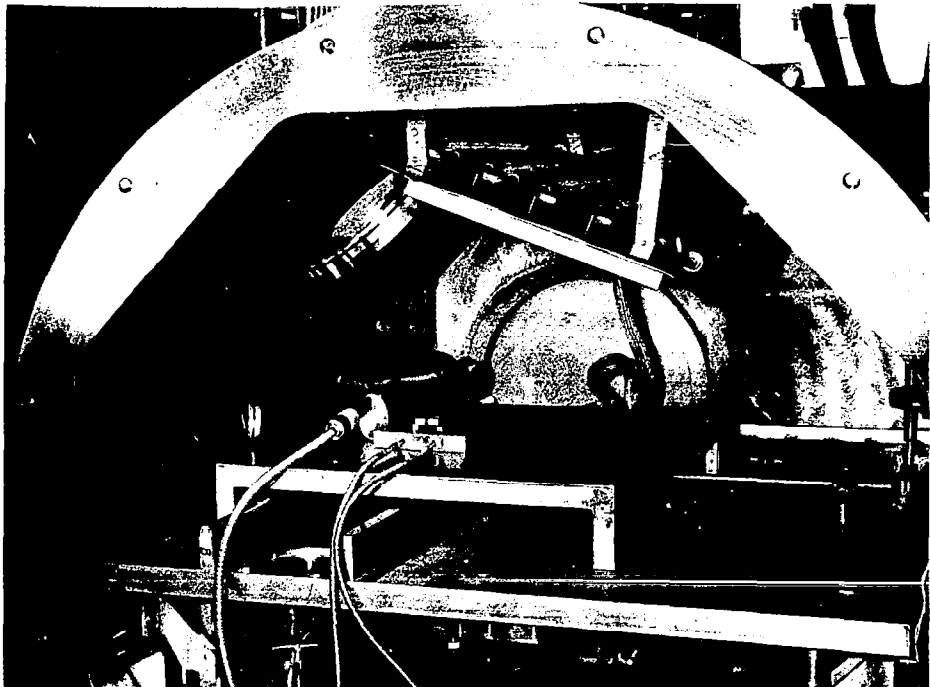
Torch and Internal Chamber Arrangement for Manual Plate Welding
